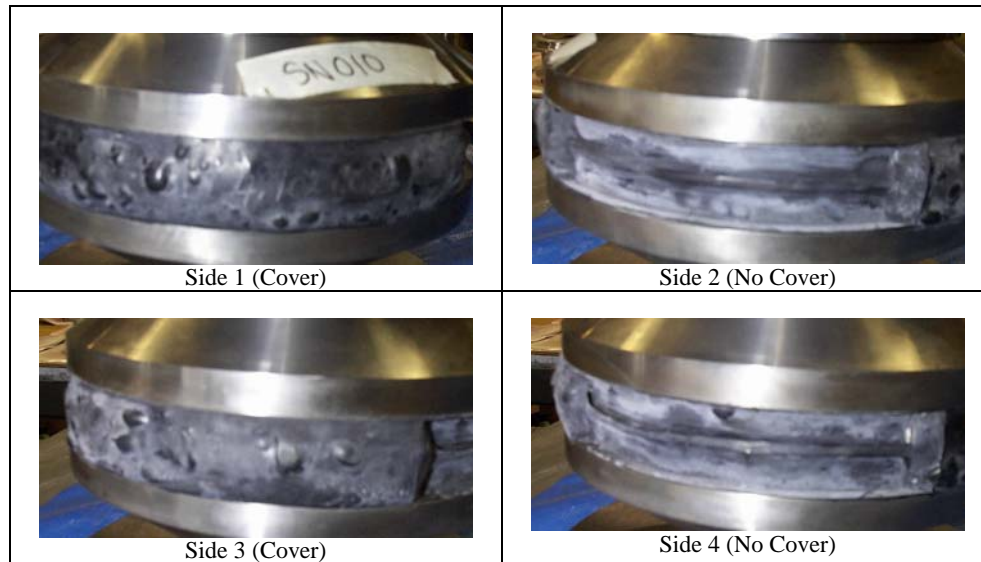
Explosive Decompression Damage in 2.5 mm Specimen (C)
